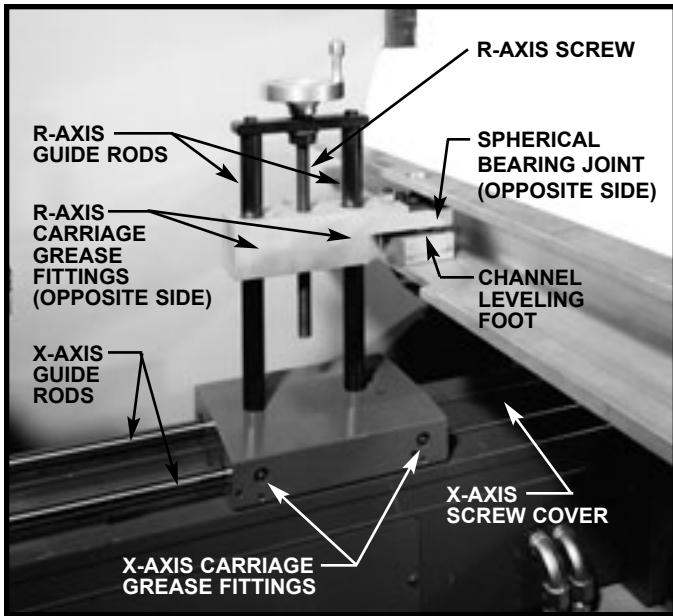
CNC Heavy Duty Backgage Manual R-axis
